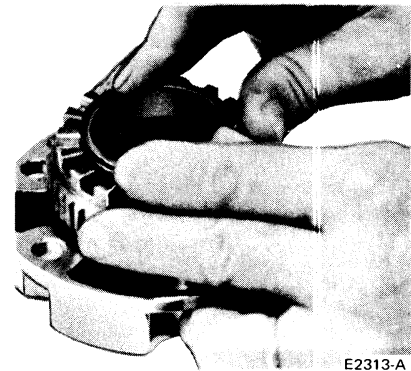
Pressure Spring and Outer Clutch Gear Installation
